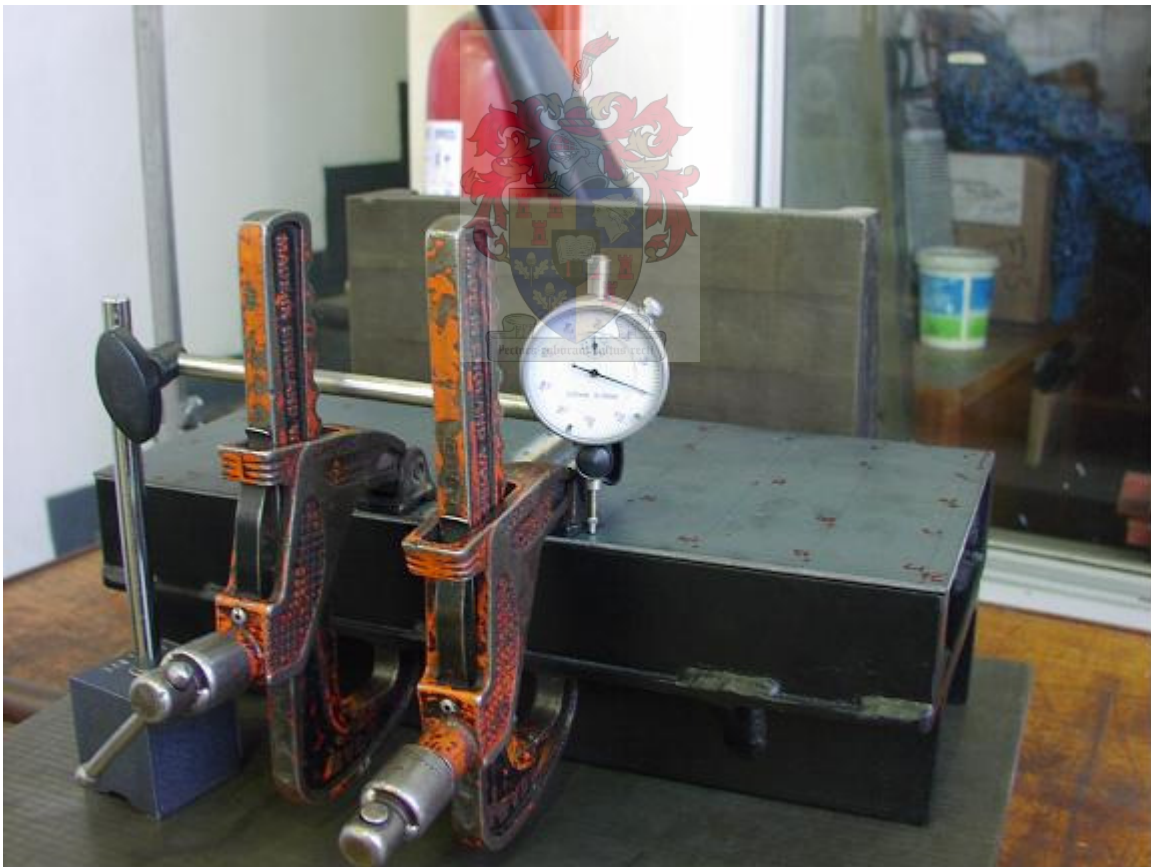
Measurement of welded plates with dial gauge on measuring table.
